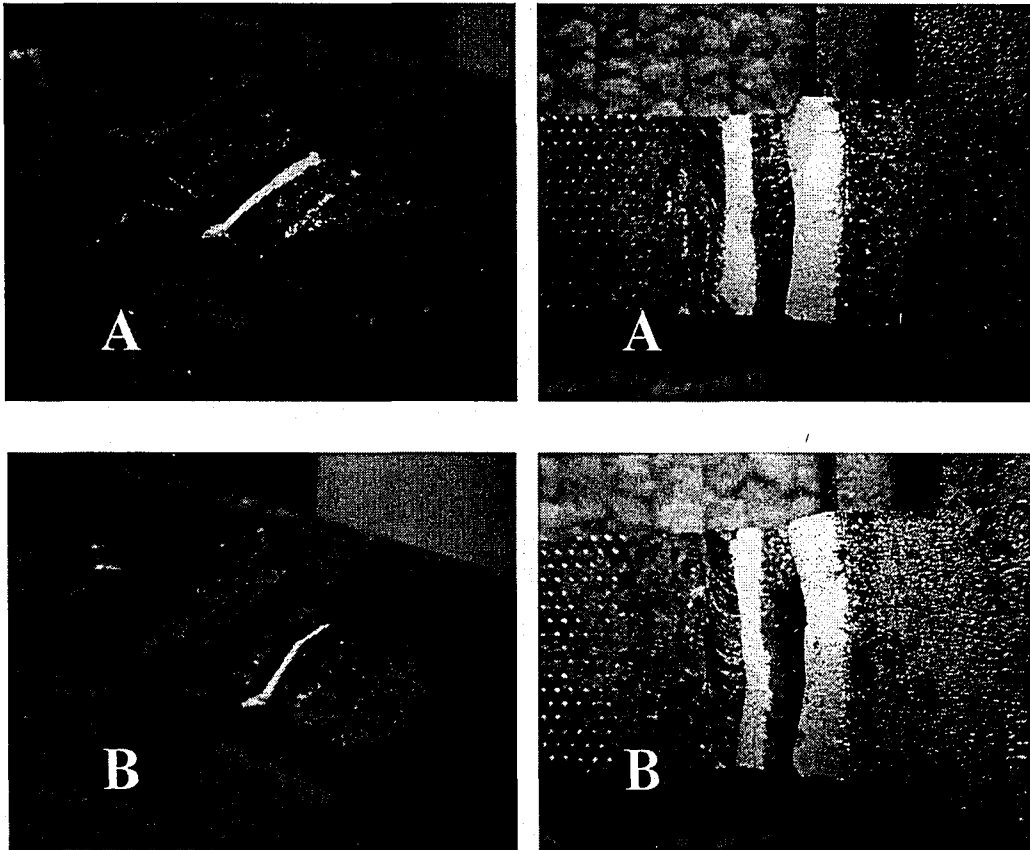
Specimen T-2 Fracture Surfaces
